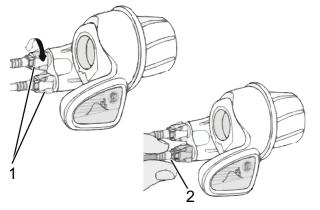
Twist grip with adjusting sleeves (1) and play in the gear shift (2) $% \left(2\right) =2$
